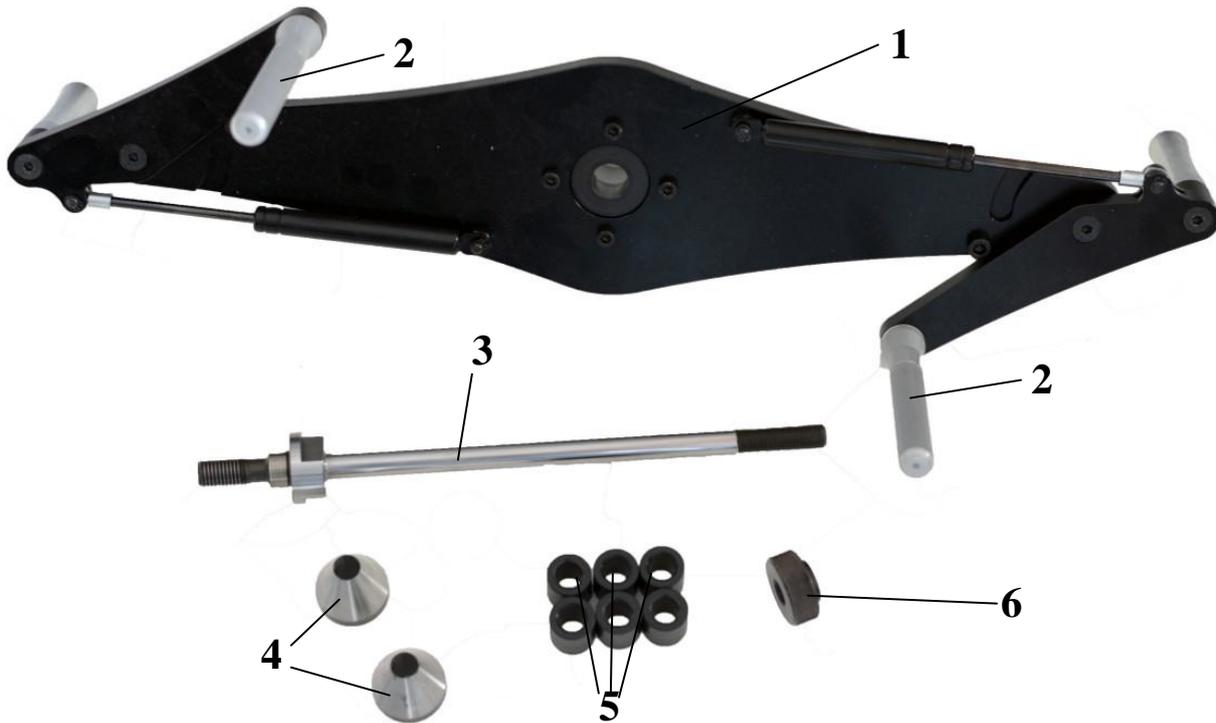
Motorcycle wheel's holder elements: 1: holder's bar with a base, 2: tyre clamp, 3: holder's axis, 4: cone muff – 2 pcs., 5: distance muff – 6 pcs., 6: holder's screw.
